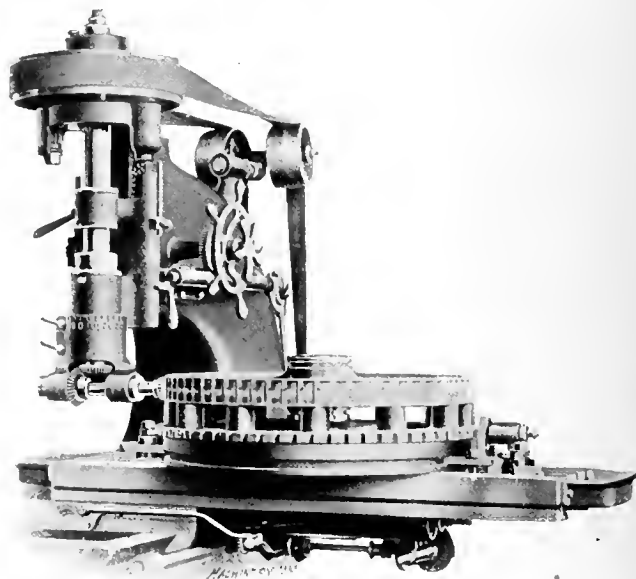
Horizontal Milling Attachment at Work on Steam Turbine Rotor.
